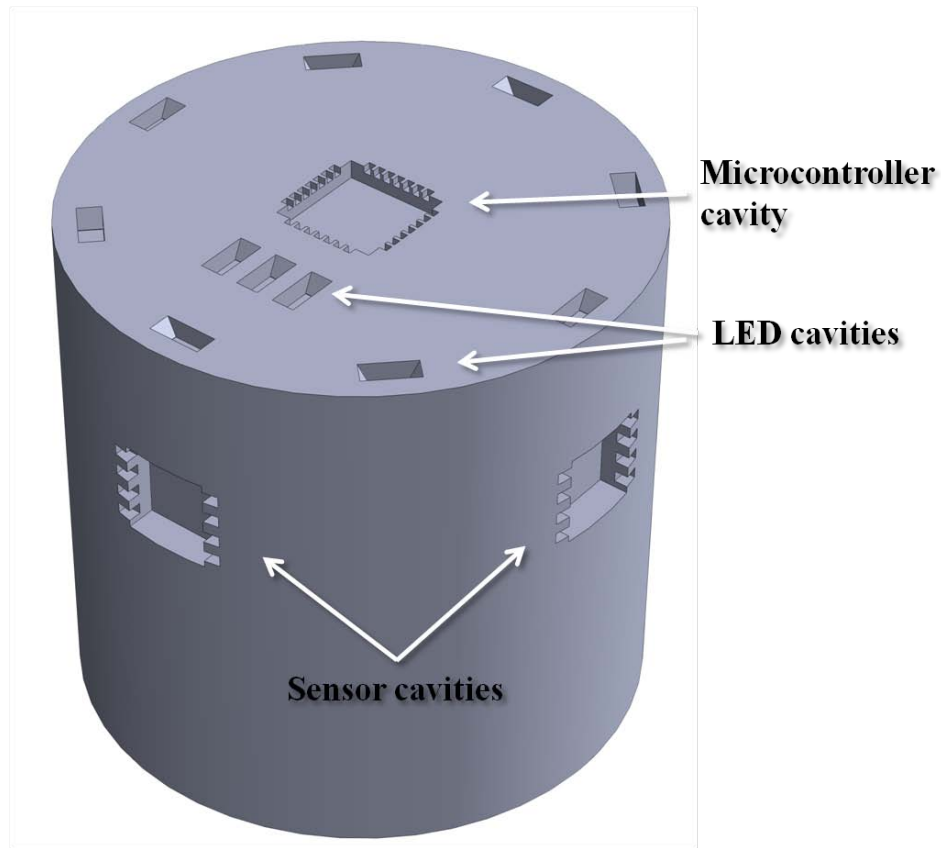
CAD design of the multi-axis magnetometer showing component cavity placement
